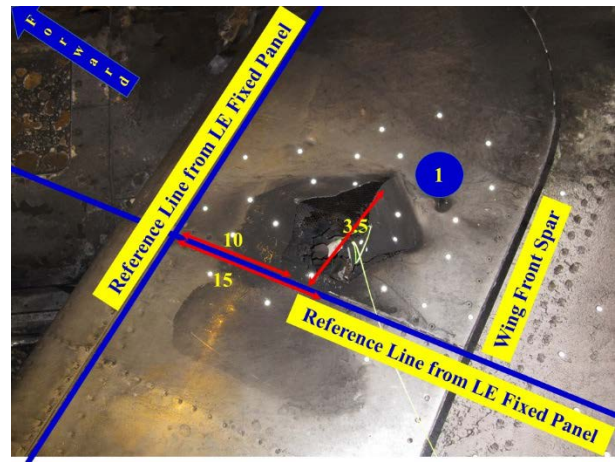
OUTBOARD PYLON/STRUT DAMAGE
